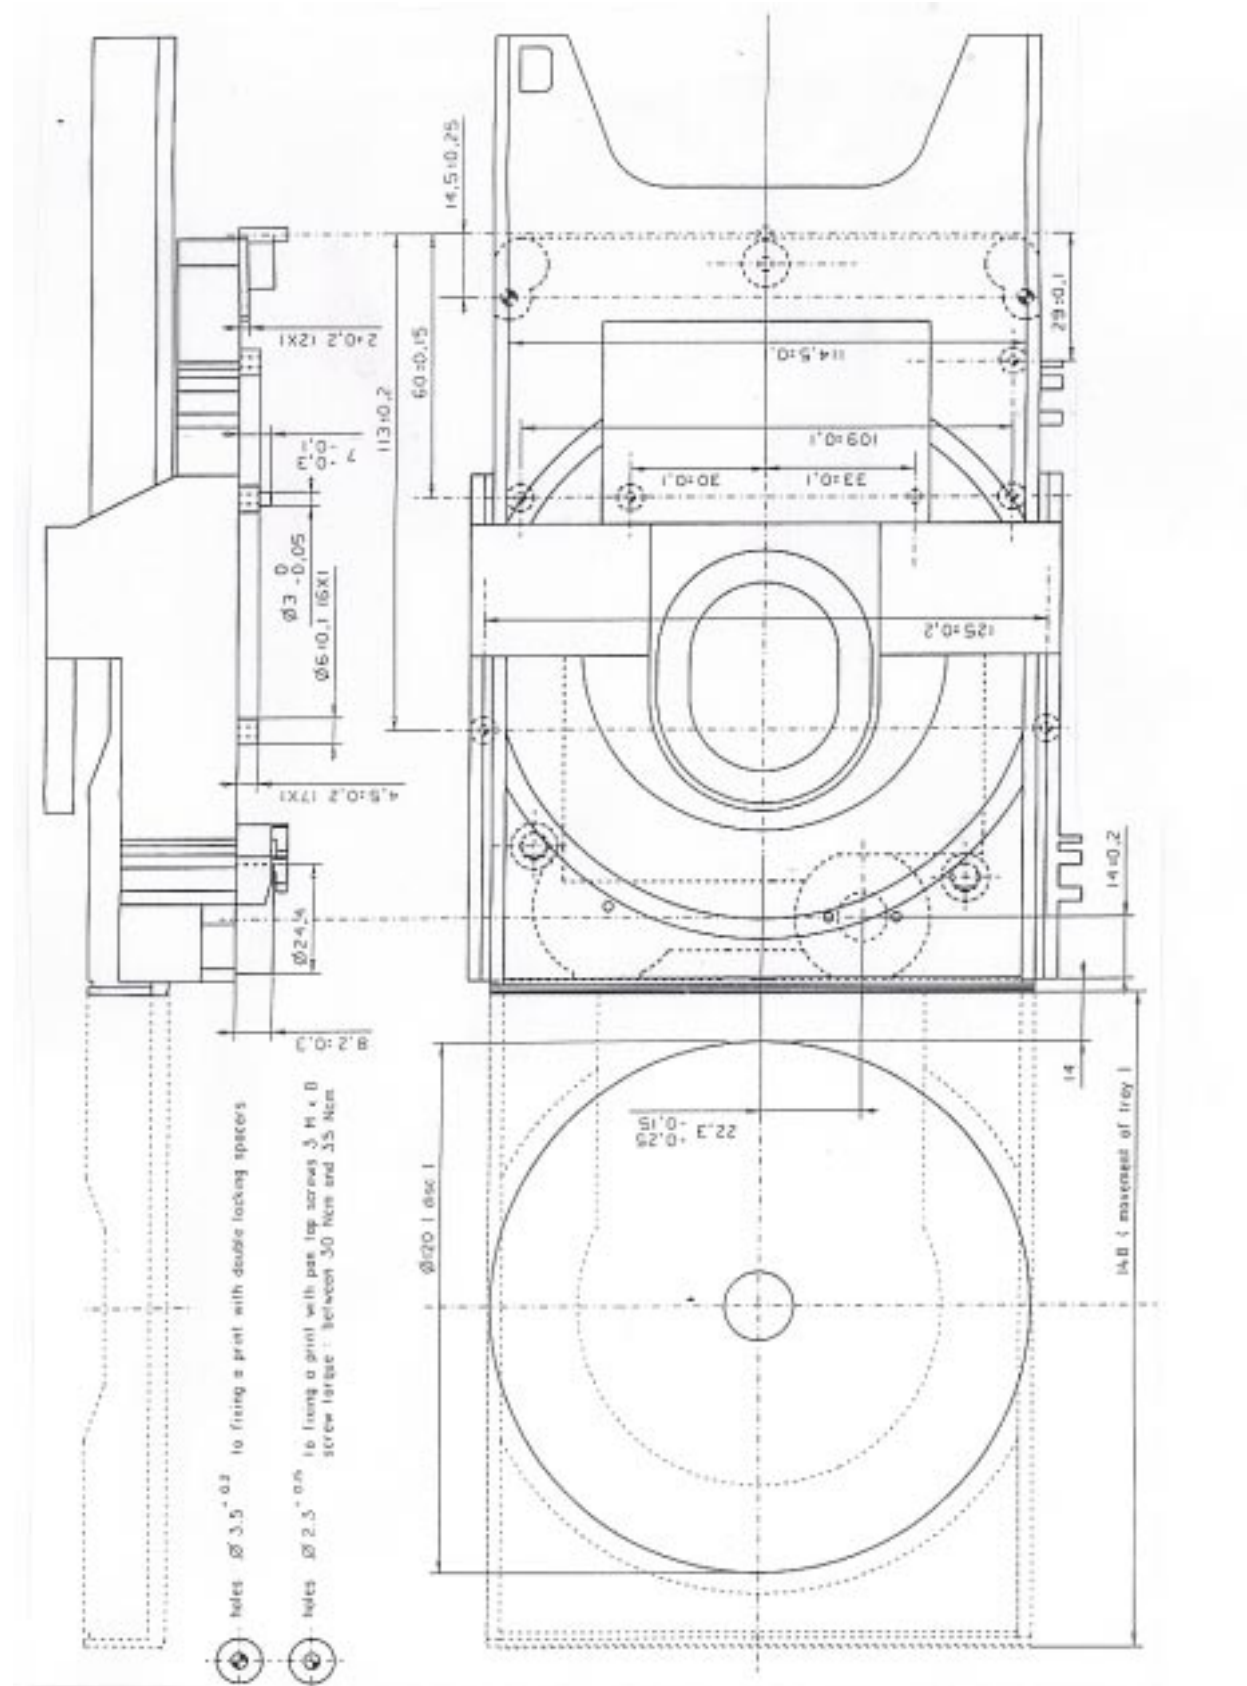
L1210/65 General Dimension (Drawing 3)
